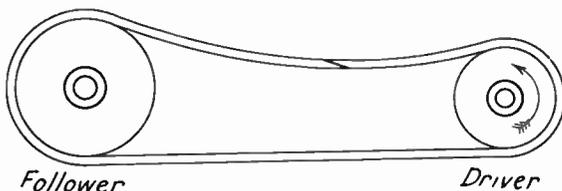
THE CORRECT DIRECTION FOR A BELT DRIVE. THE SLACK SIDE OF THE BELT IS UPPERMOST.
